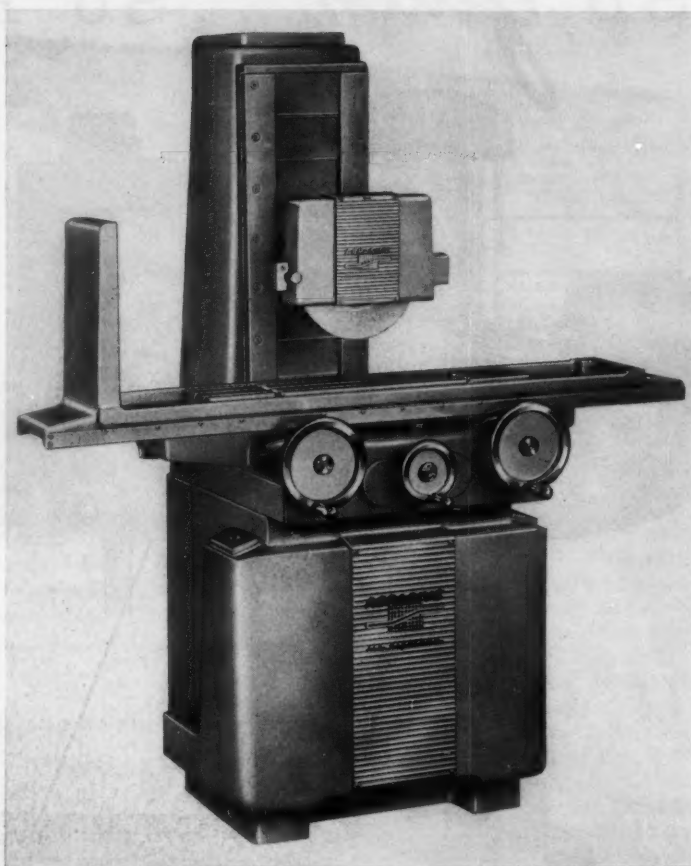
Precision surface grinder brought out by Abrasive Machine Tool Co.
